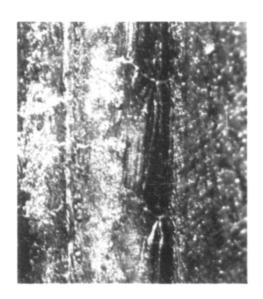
Tungsten-Arc Weld, dc, on E-130R2 Bomblet Without Filler-Metal Addition
